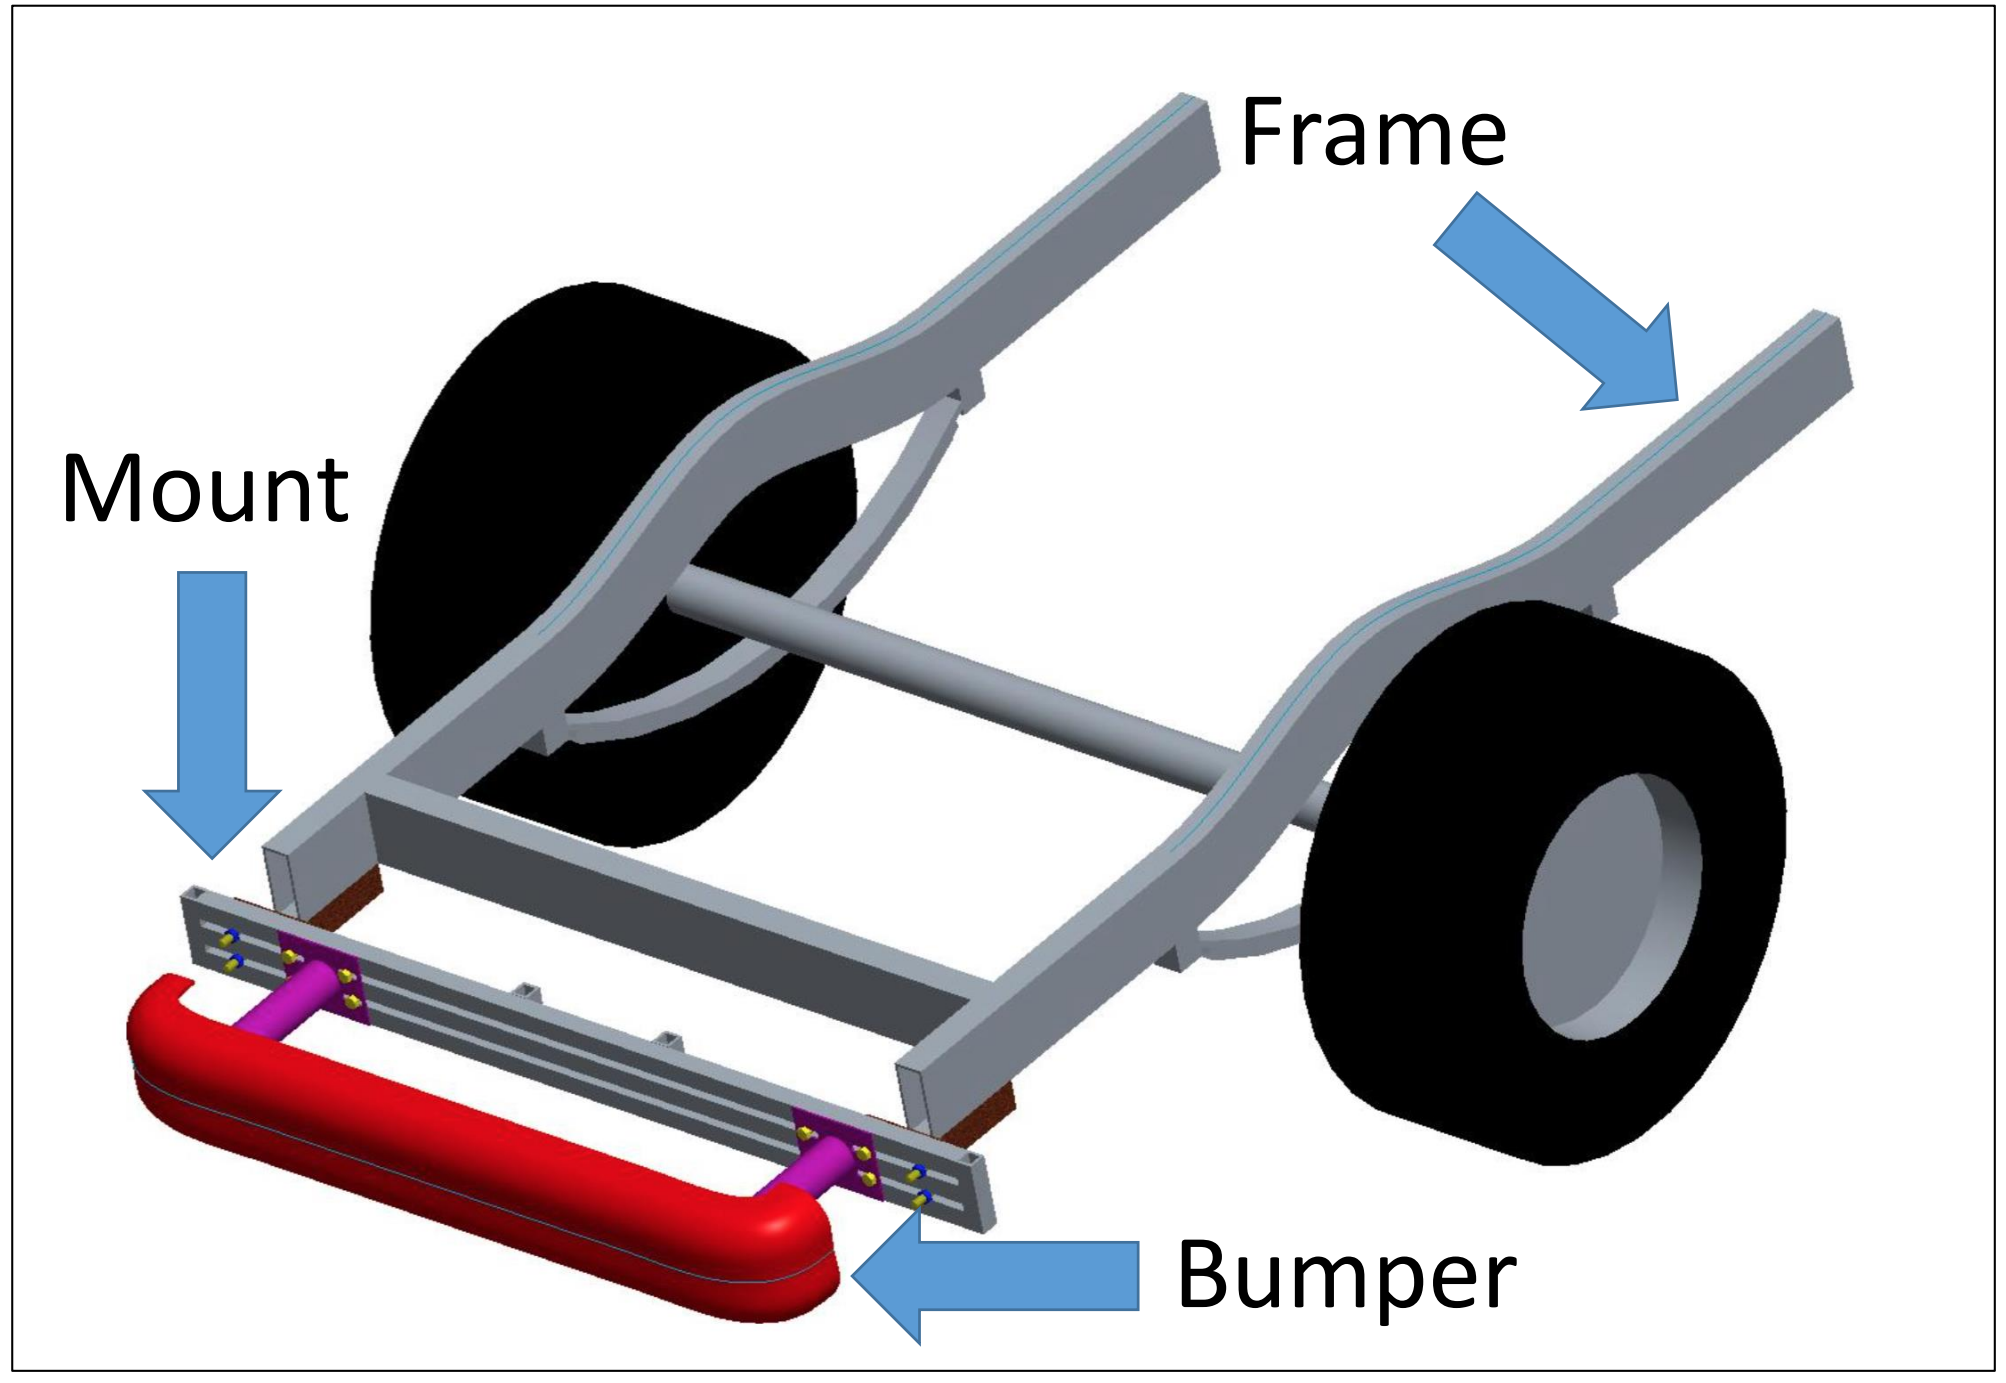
Final Interchangeable Bumper Mount design attached to a vehicle frame with a piston isolator bumper on the front.
